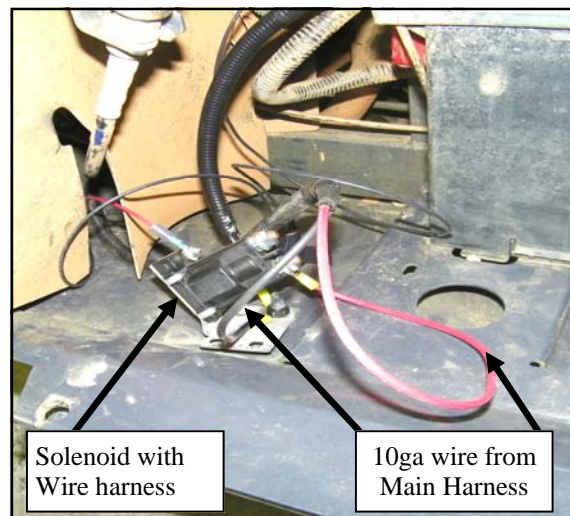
Left side view of RTV X900—X1120 with molded side panel removed
